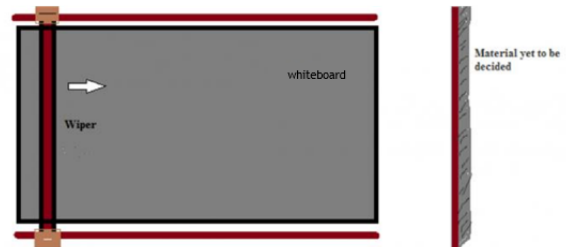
3D representation of the marker board and moving cleaner assembly.
